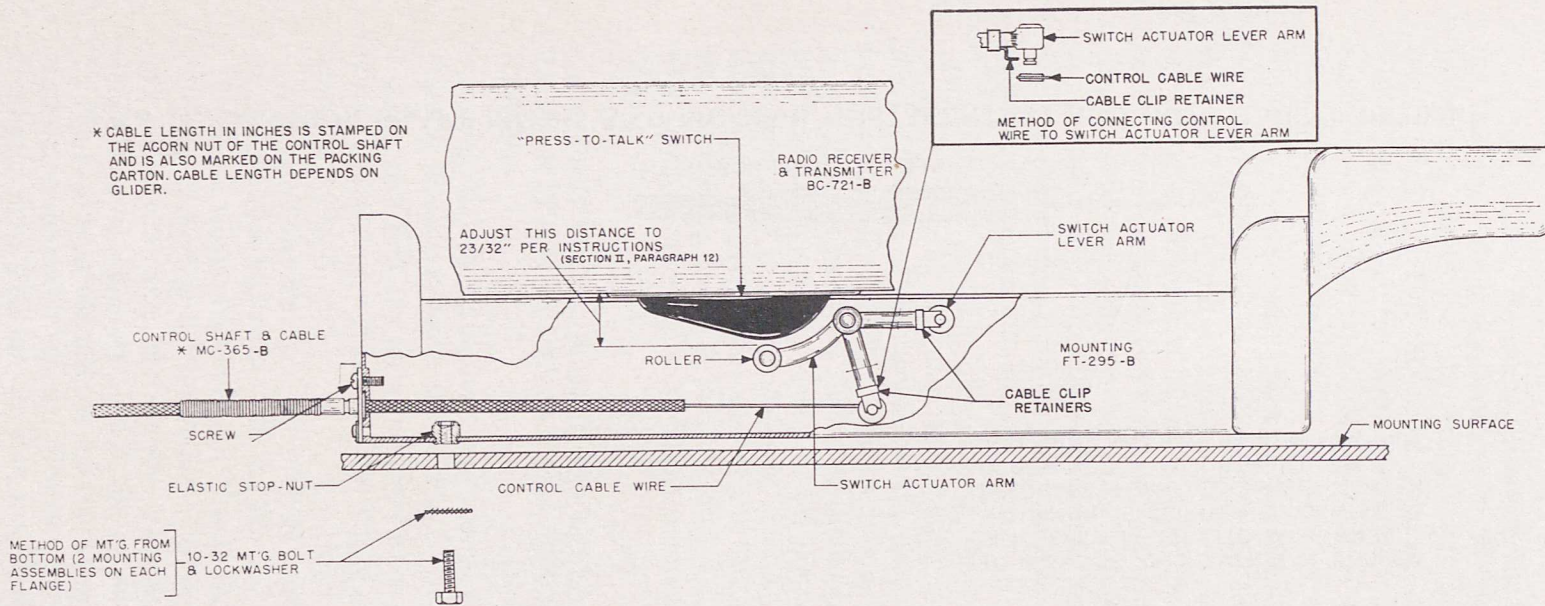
CONTROL SHAFT MC-365-B, INSTALLATION, SHOWN IN END FASTENED POSITION
